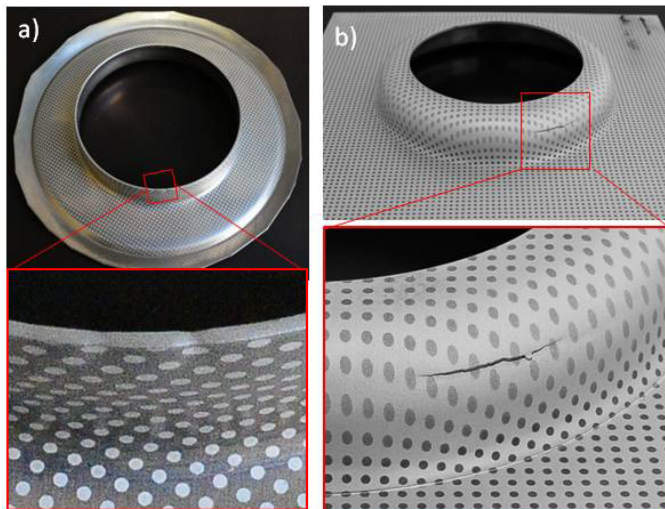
Comparison of the mechanisms of failure between both flanging processes. Failed tests with a 60 mm pre cut hole diameter and an 8 mm tool radius by conventional press forming (a) and single-stage SPIF at 0
